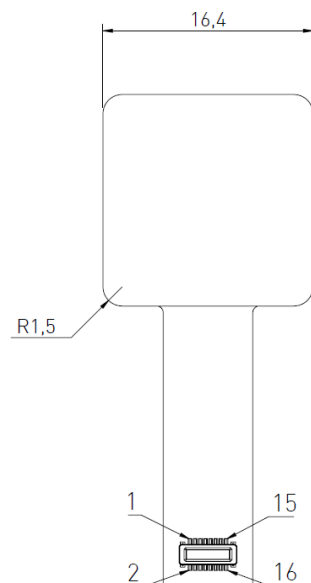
Part Drawing FPC1020AM CM03 – bottom view
